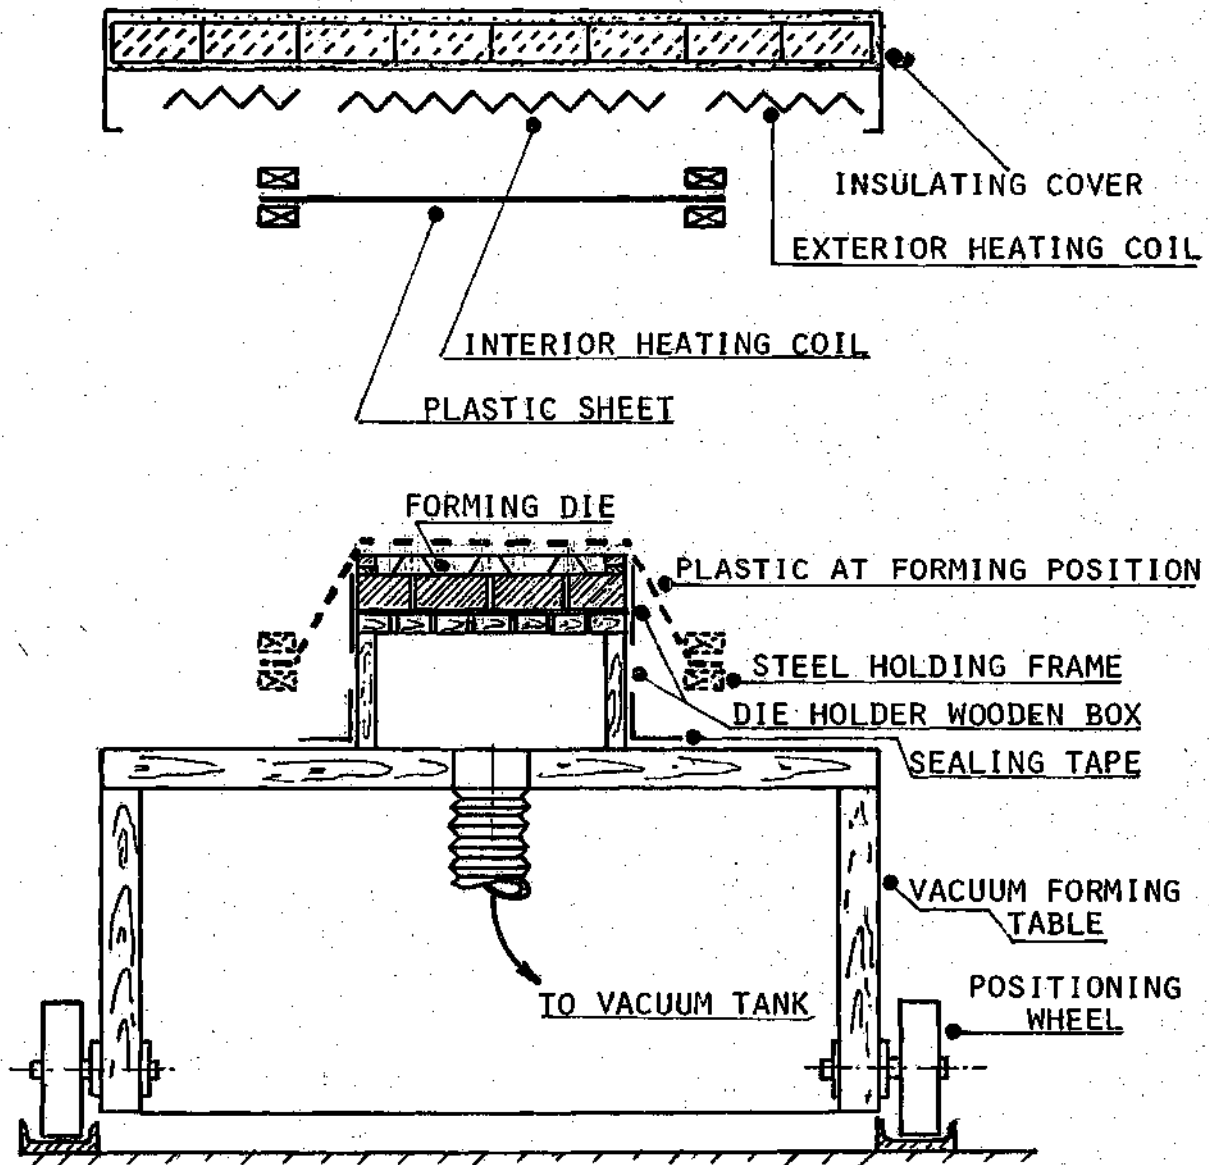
Schematic Representation of Vacuum Forming Machine.
